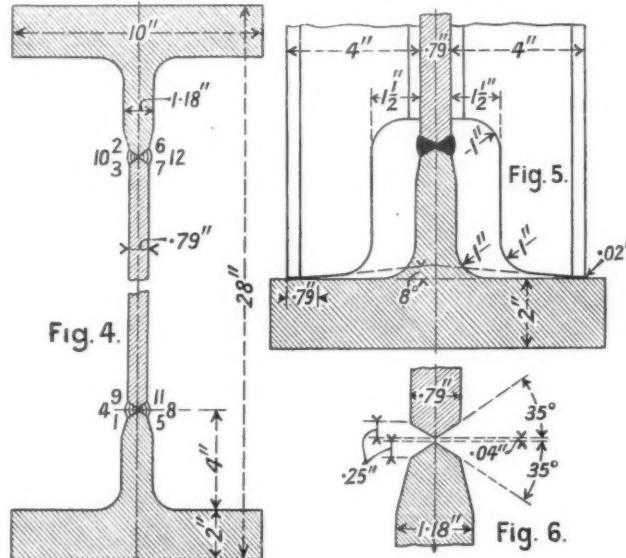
Tee-section flange girders No. 7 to 10: Cross section and welding sequence
